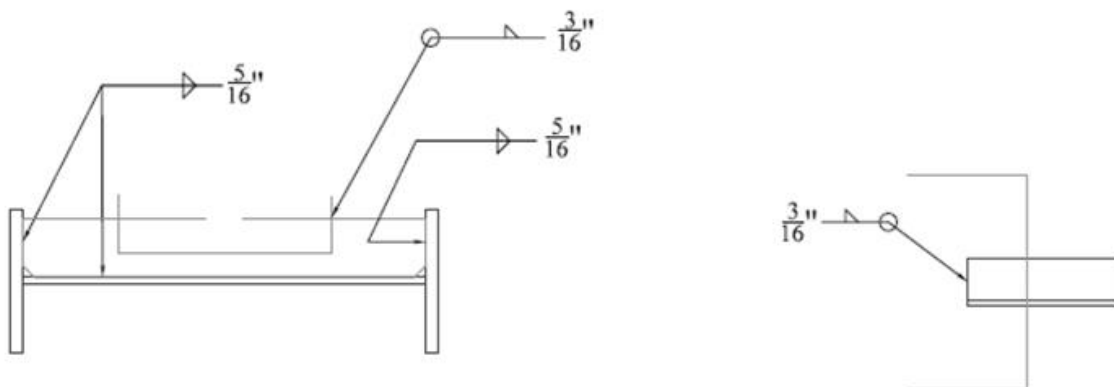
Specimen Weld Details for (a) Stiffener and Bent Plate and (b) Angle
